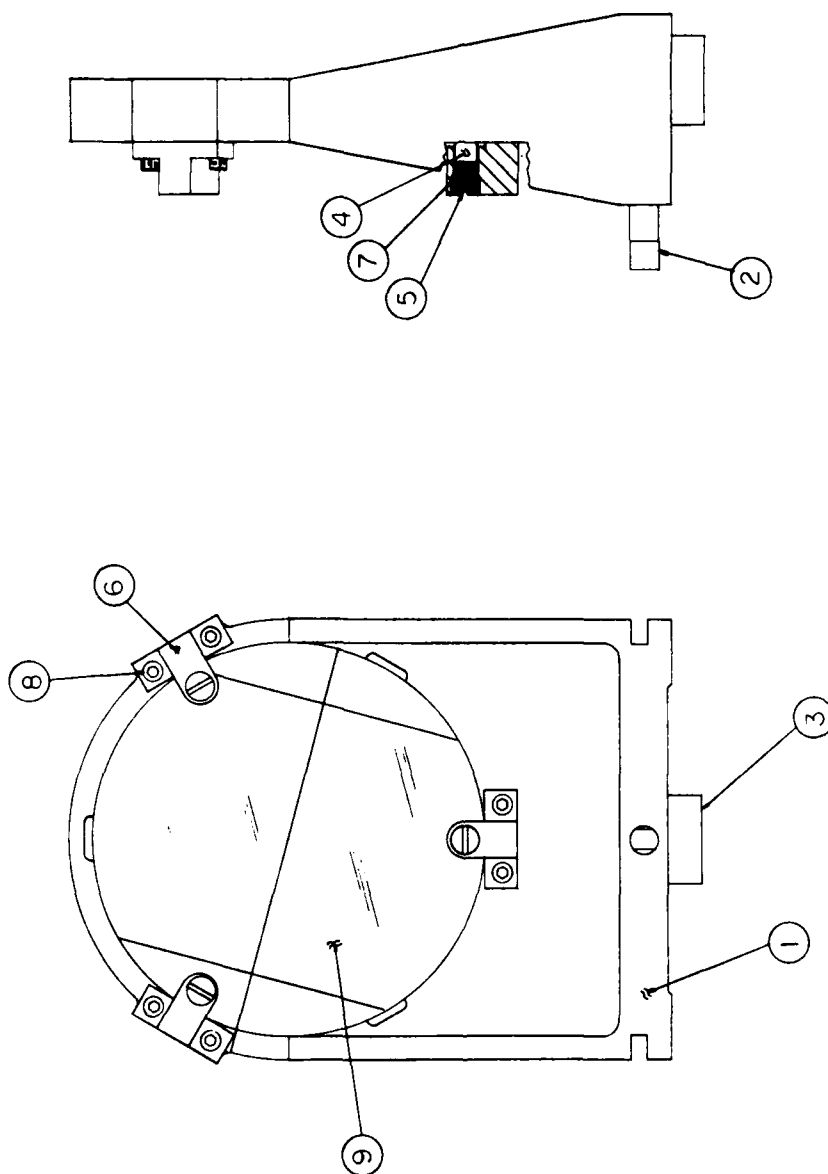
The mount used for the KBr beamsplitter: 1) KBr beamsplitter mount, 2) Rotating pin, 3) Location pin, 4) Pressure pin, 5) Pressure pin locking screw, 6) Pressure pin pedestal, 7) Compression spring, 8) Socket head cap screw, 9) KBr beamsplitter.
